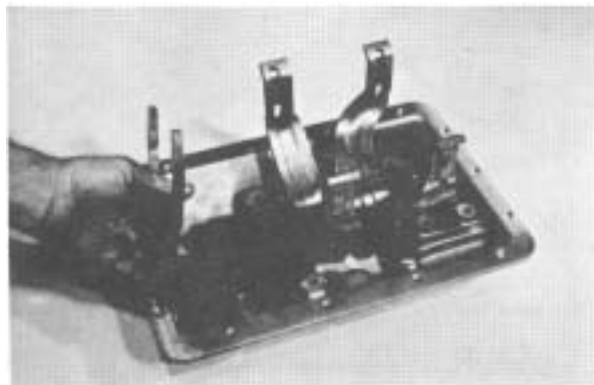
Remove 1st & reverse shift fork and rail assembly.
